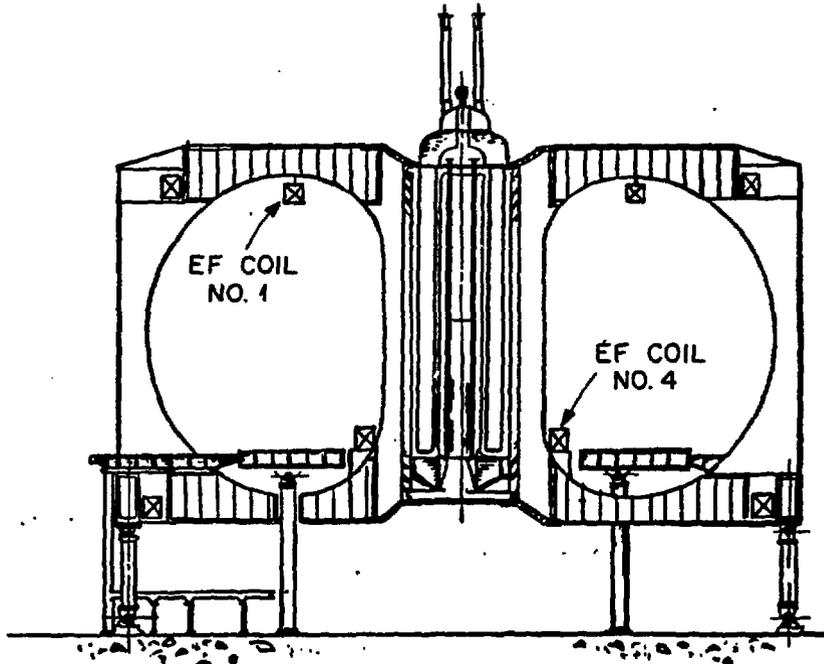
Initial assembly of the FED device - installation of jointed copper coils, EF #1 & #4.
